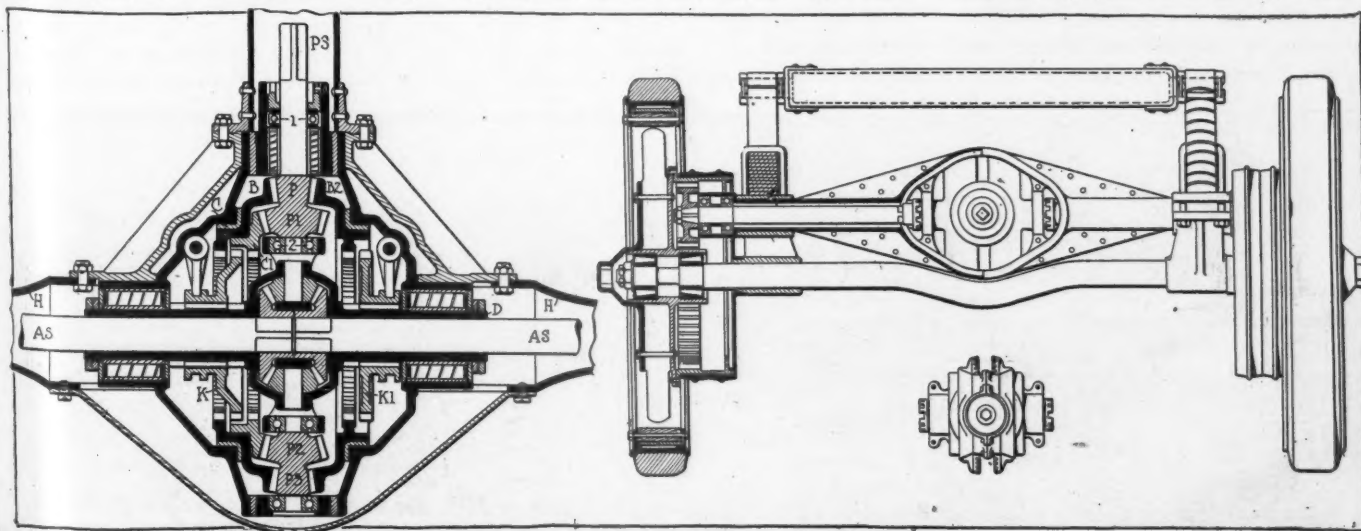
COLLINS REAR AXLE TRANSMISSION GEARSET, AND INTERNAL GEAR DRIVE CONSTRUCTION
